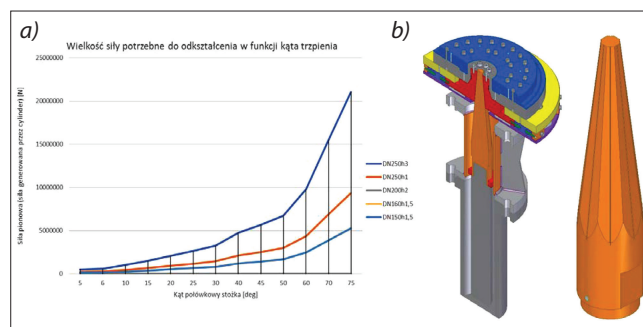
a) forming force vs. mandrel angle relationship, b) modular forming assembly
